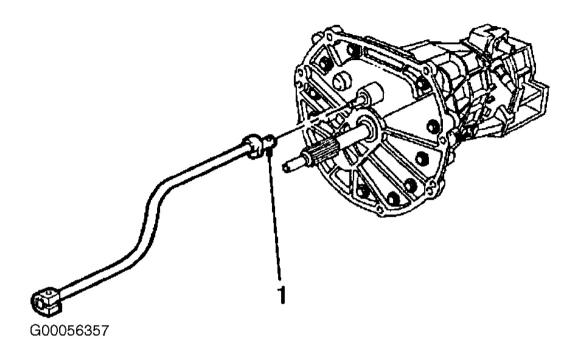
Removing/Installing Shift Rod Courtesy of GENERAL MOTORS CORP.
